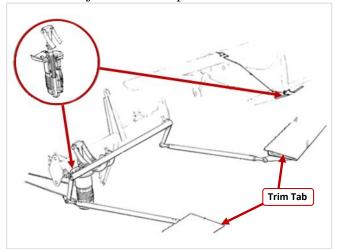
Principle sketch of the elevator trim system. Screw jack drum in detail circled, the arrows points to where the drum is installed in the aircraft. The markings are inserted by SHK. Picture: Viking Air Limited.
